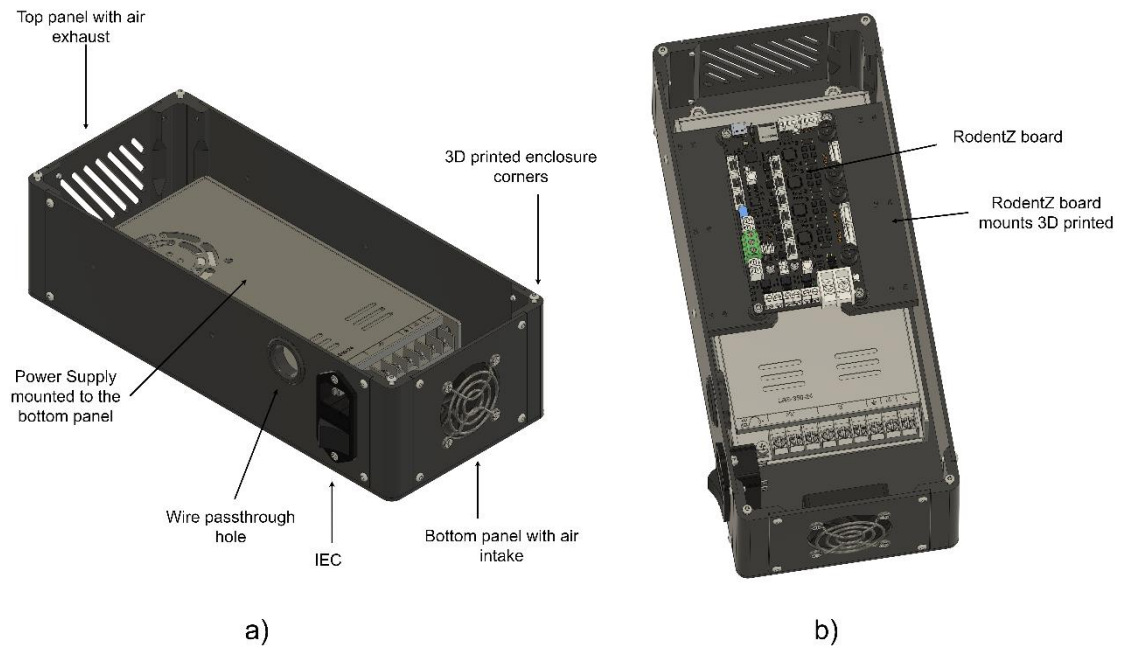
a) Mill electronics enclosure hosting the power supply, RodentZ board, IEC and cooling fan, made out of acrylic panels and 3D printed corners. b) Mill electronics enclosure with RodentZ control board mounted to its 3D printed mounts, with M3 threaded heat inserts.
